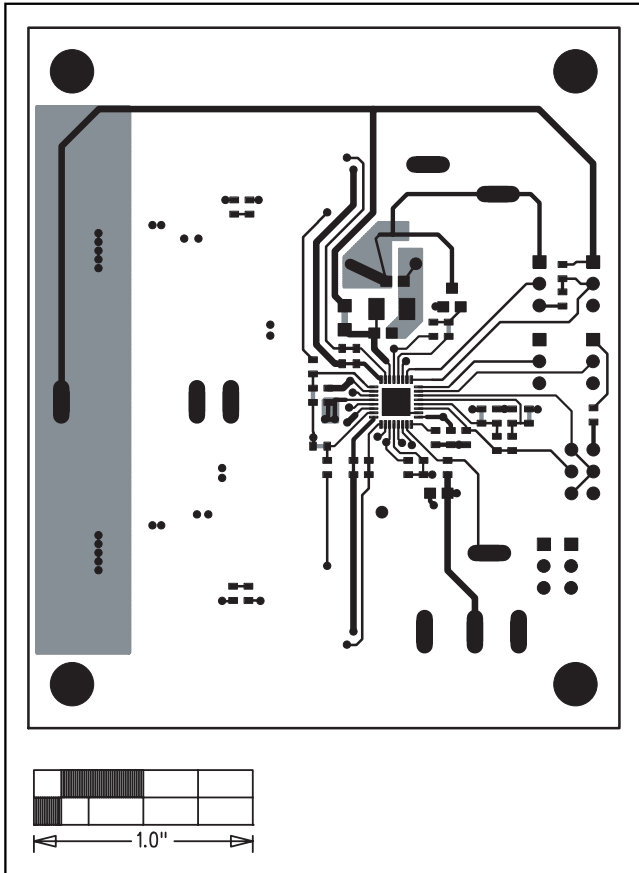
MAX1533 EV Kit PC Board Layout—Solder Side
